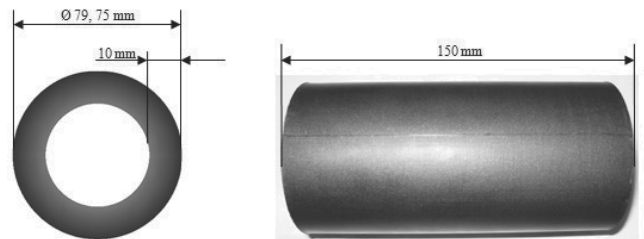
Specimen of gradient material (cured epoxy resin with hard coal filler) made by centrifugal casting method
